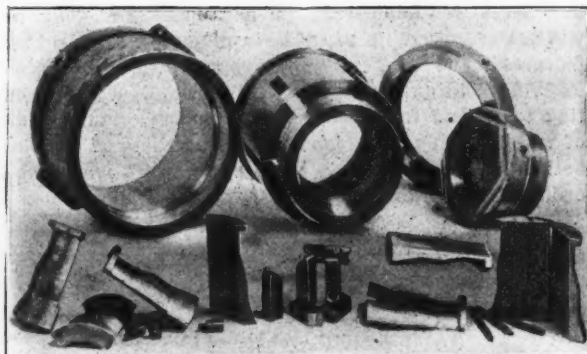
The Unassembled Parts of the Rod Chuck.
